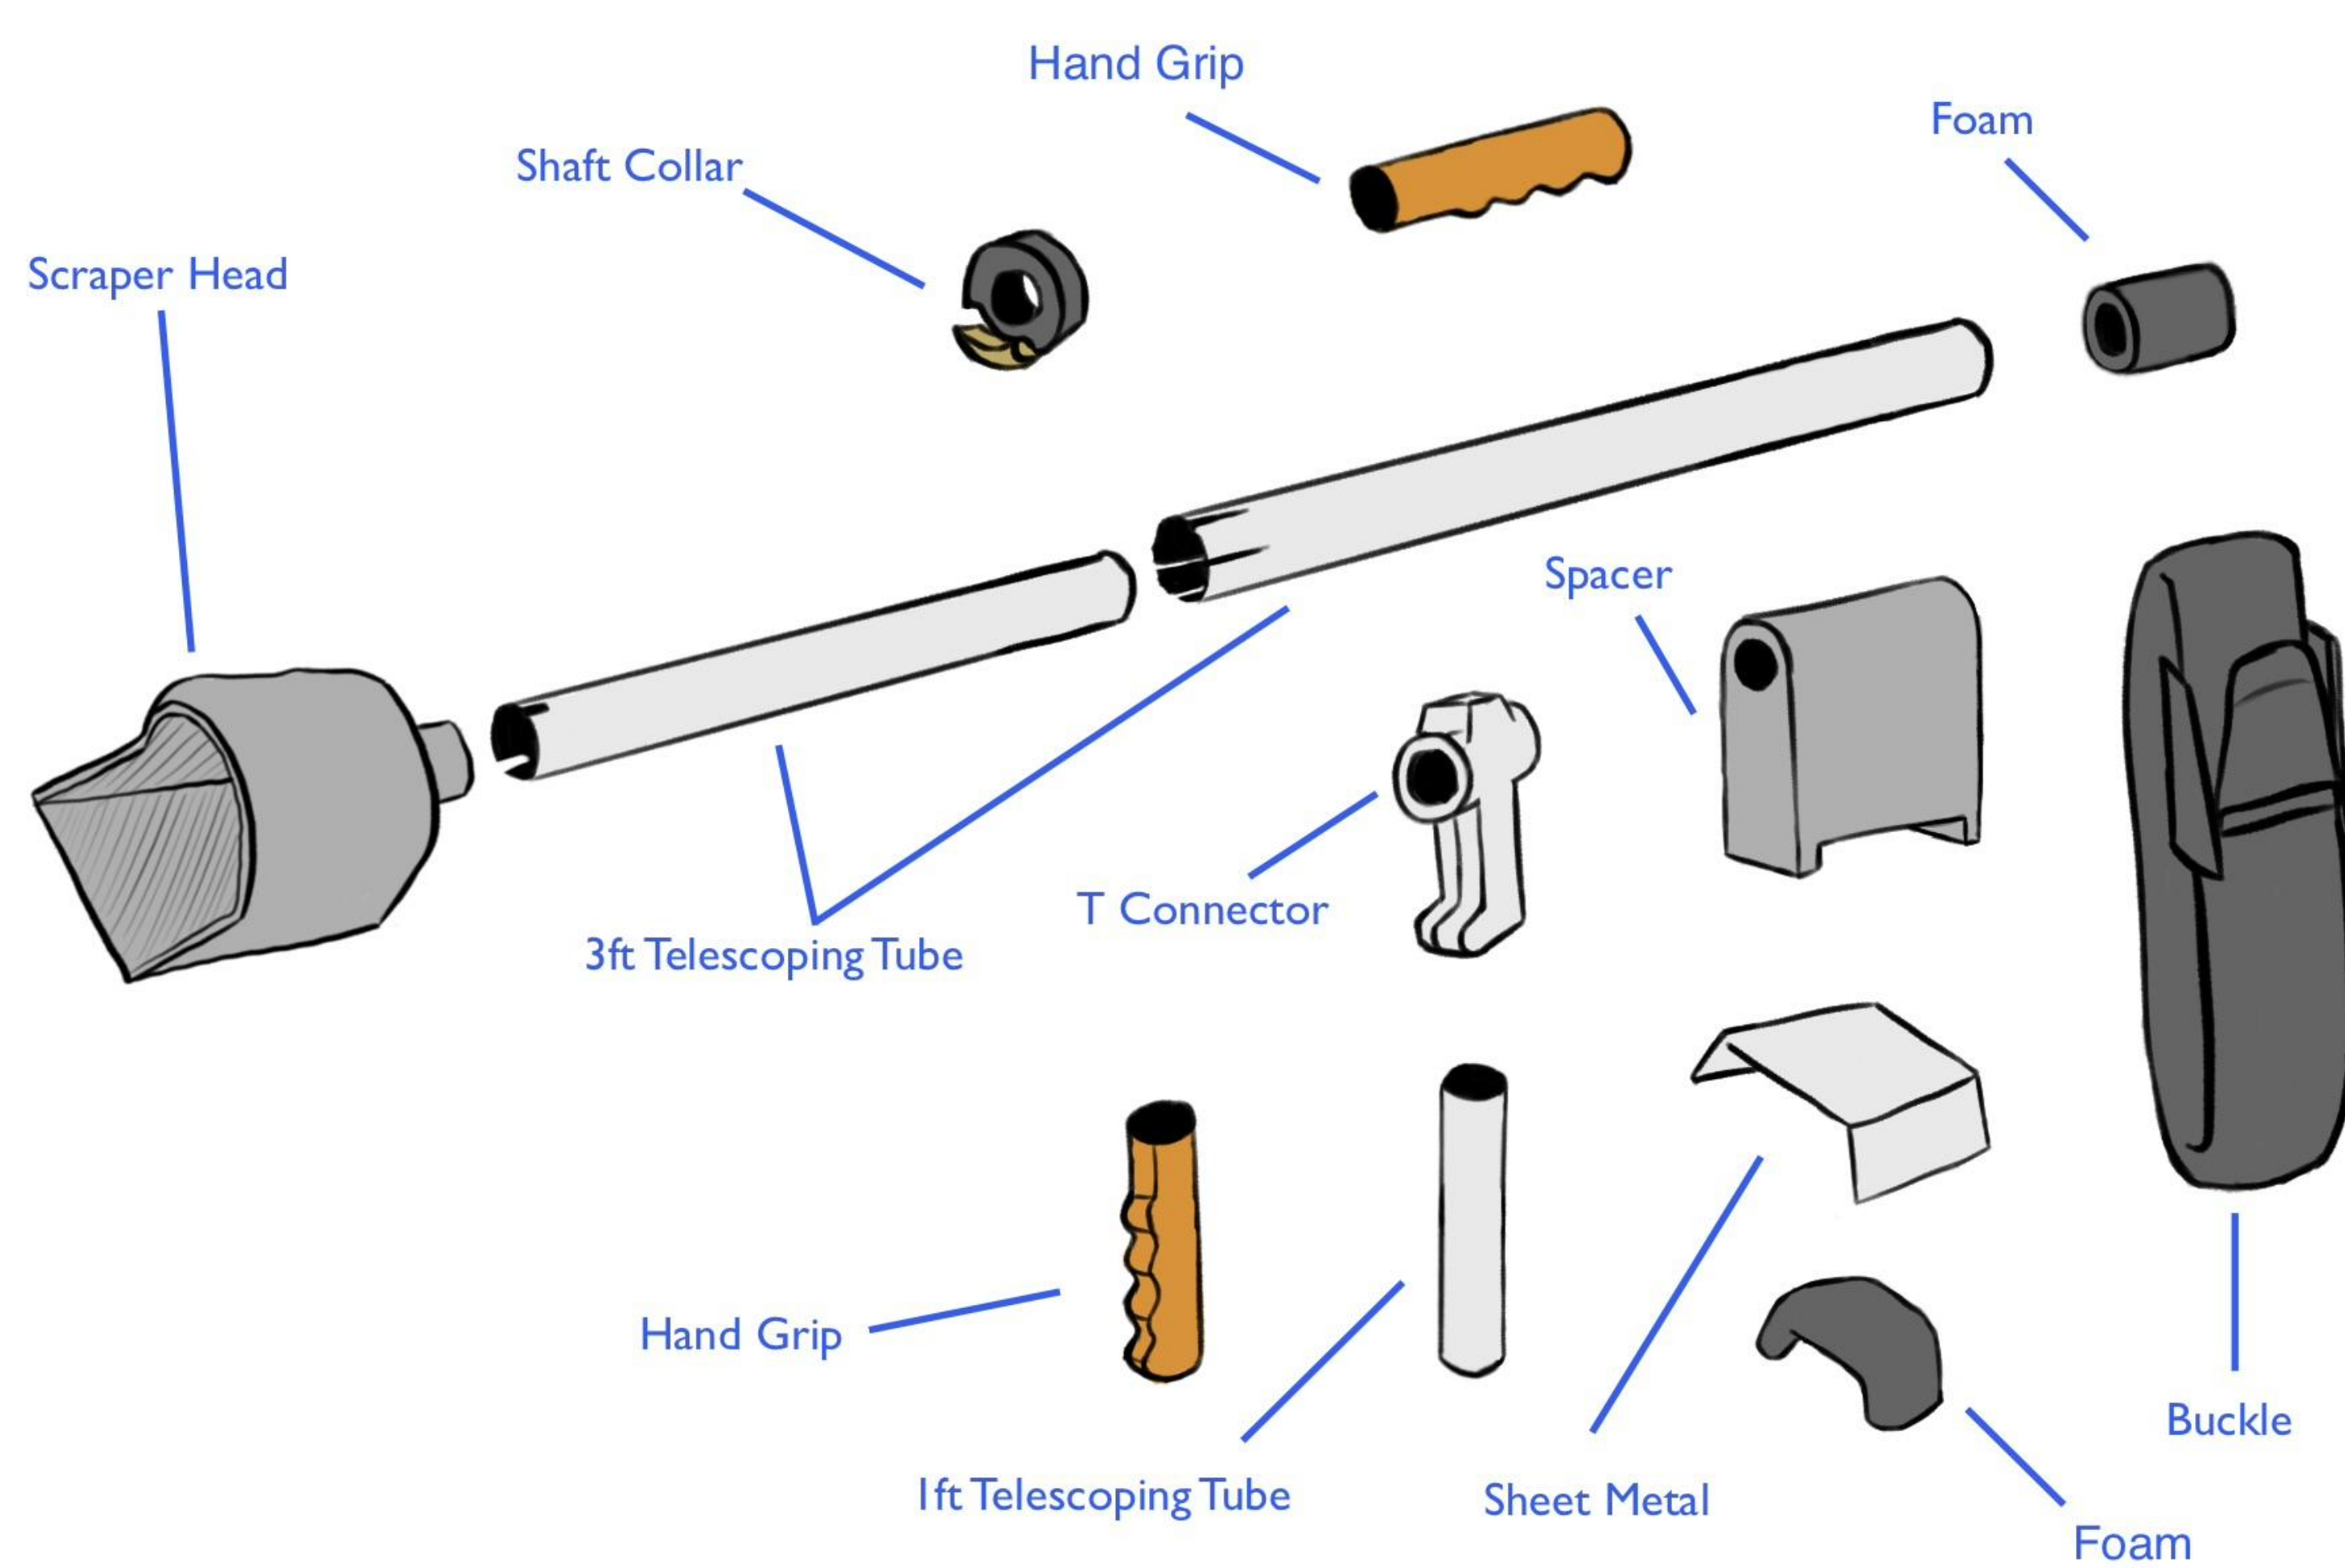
Exploded CAD Assembly of Final Prototype. The system features a telescoping pole, a custom head, and an ergonomic handle. To manage high torque generated by scraping, the base incorporates a forearm brace.
